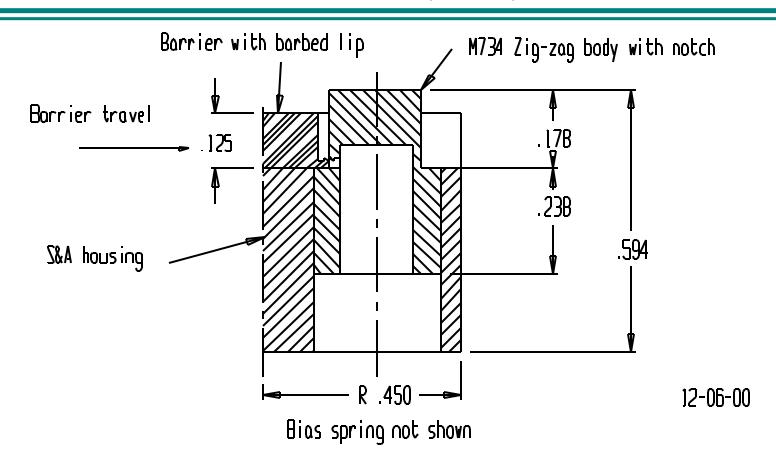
Half-Section of Fail-Safe Latching Barrier for Angular, Out-of-Plane S&A Layout
